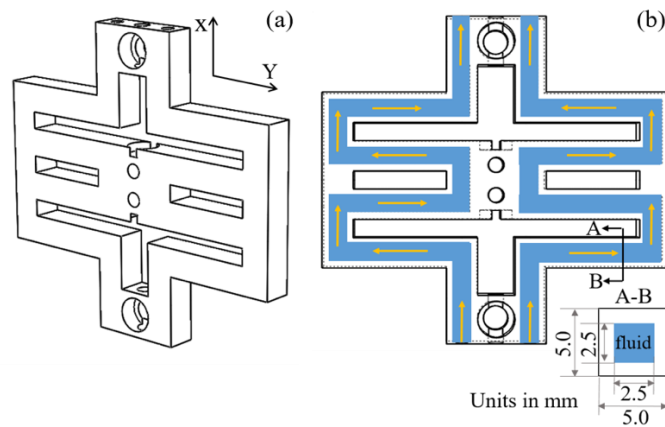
Design of flexure based FPFM: (a) 3D CAD model and (b) cross-section view.
